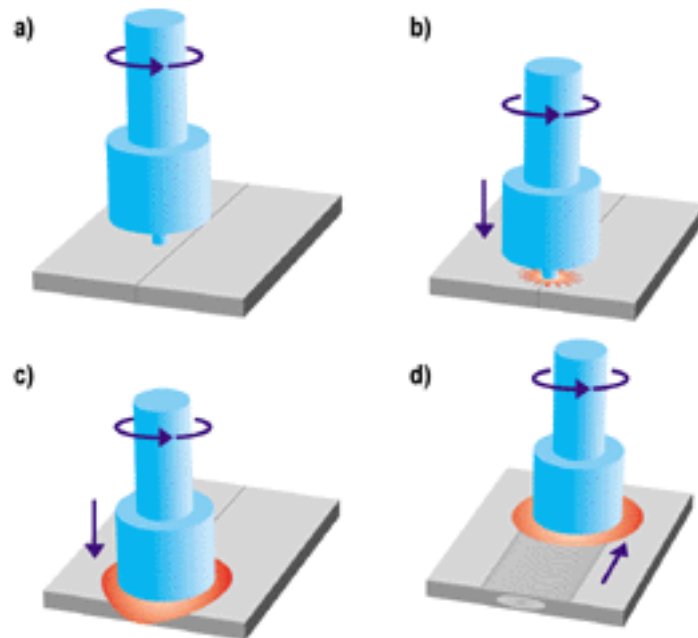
The Friction Stir Welding Process, (a) preparing to plunge, (b) plunging pin into material, (c) force applied on shoulder, and (d) transversing along the weld line.
